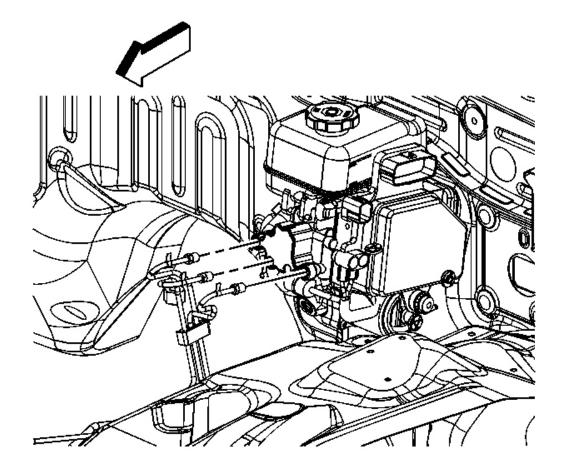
Identifying Rear And Left Front Brake Pipes At Brake Master Cylinder Courtesy of GENERAL MOTORS CORP.
